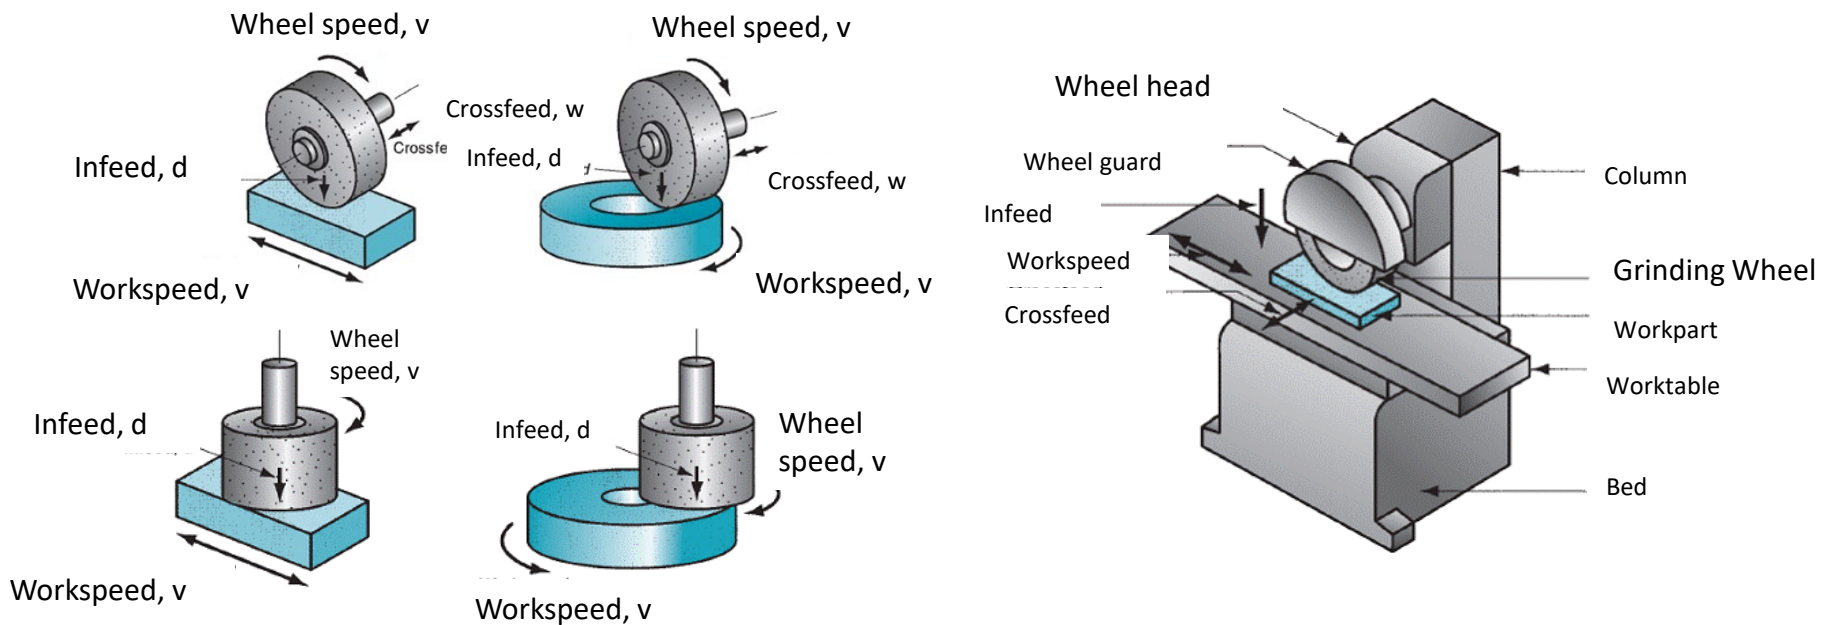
surface grinding. Source: <https://www.forturetools.com/8-points-common-knowledge-of-grinding-wheel-safety/>
